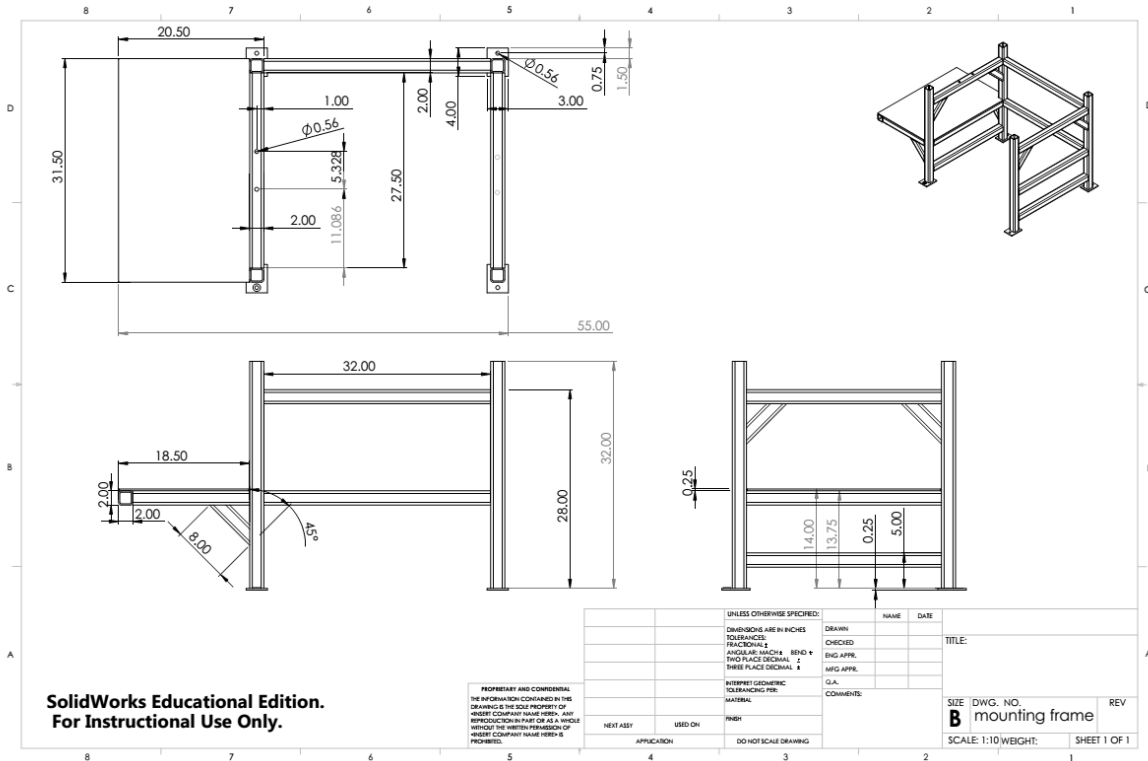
Mounting Frame of the Toroid Wheels and the Motor
